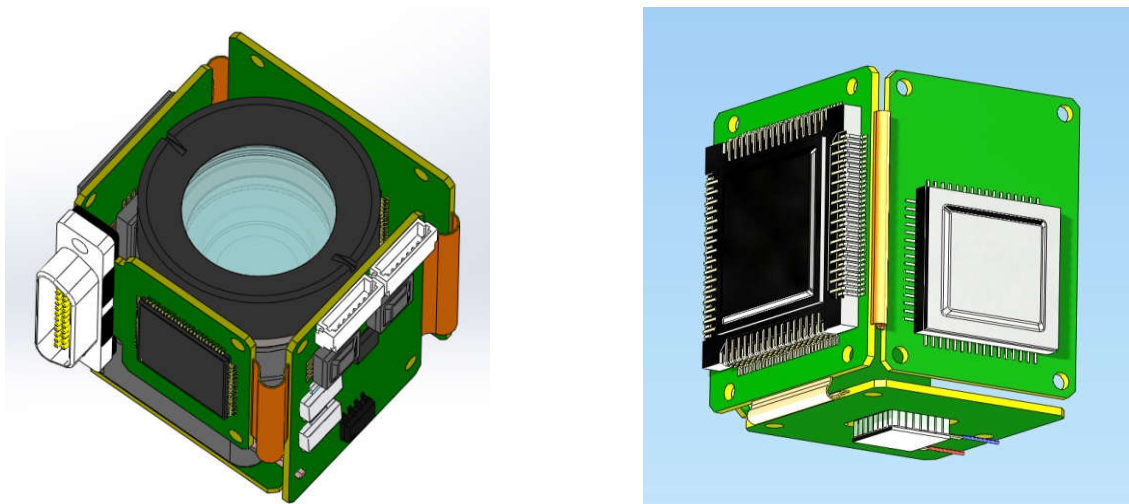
Flex-rigid printed board with installed chips, folds into a "cube" for installation in a body of a star tracker
